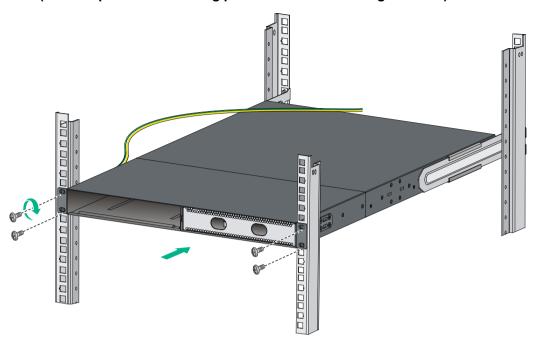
Mounting the HPE 5930-4Slot/HPE 5930-4Slot TAA switch in the rack (power supply-side mounting position for the mounting brackets)
